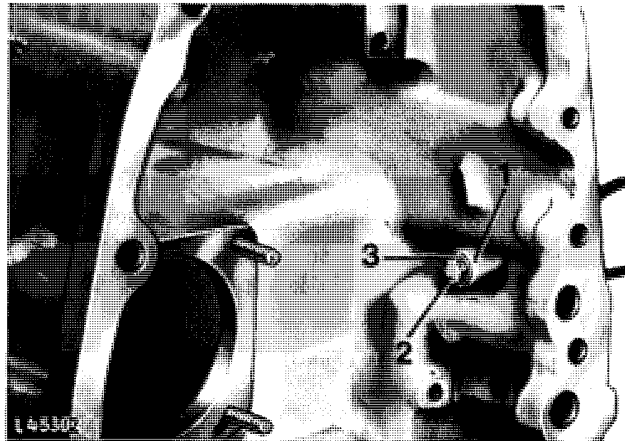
Installing Hydraulic Pump Pressure Line Adapter
